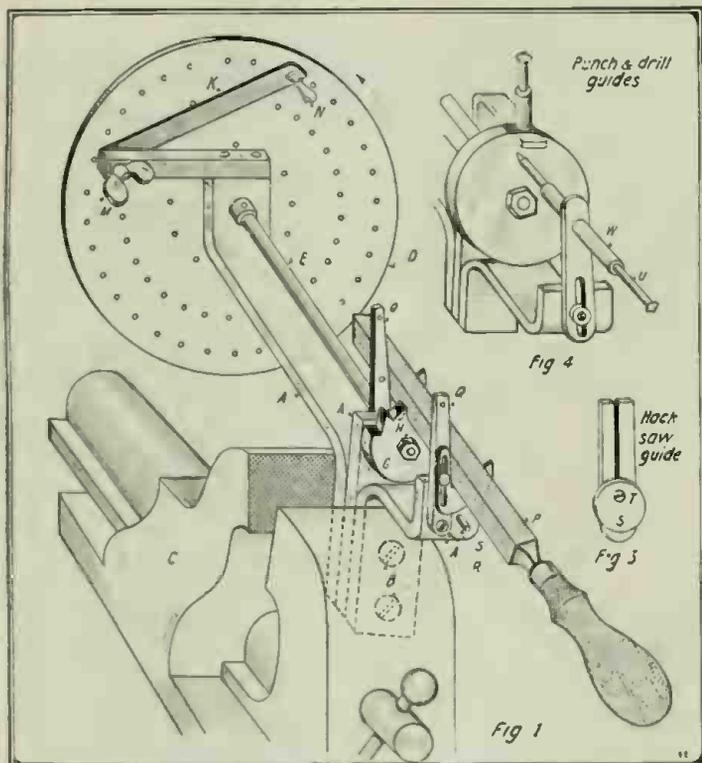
General View of the Hand Milling Machine Which Every Experimental Machinist Will Want to Build. Not Only Is It An Extremely Serviceable Device, But It Gives the Fundamental Ideas of the Larger Milling Machines. This Device, Altho Quite Simple, Is Capable of a Surprisingly Large Variety of Work.
